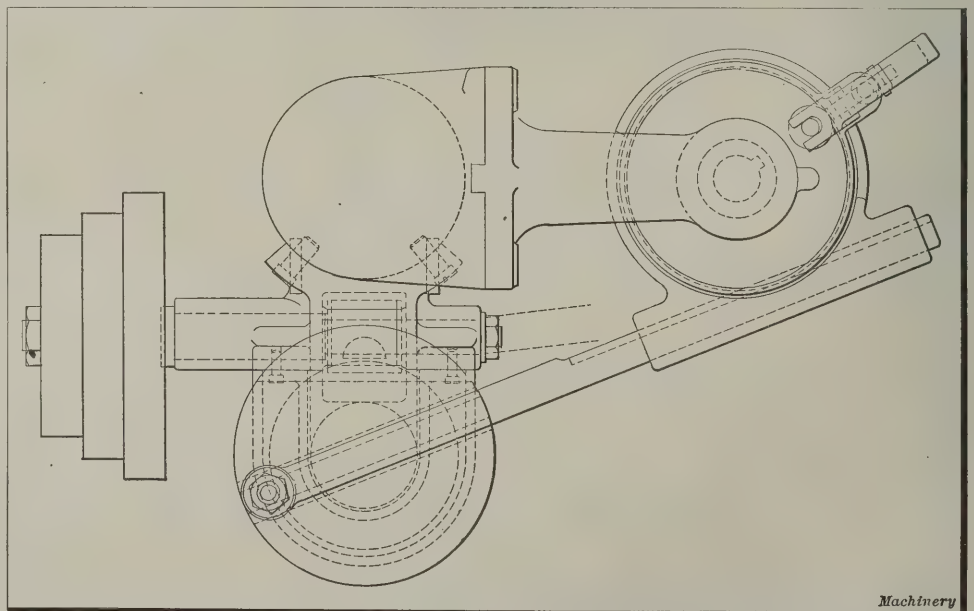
Mechanism of Power Drive for oscillating Grinder Head
